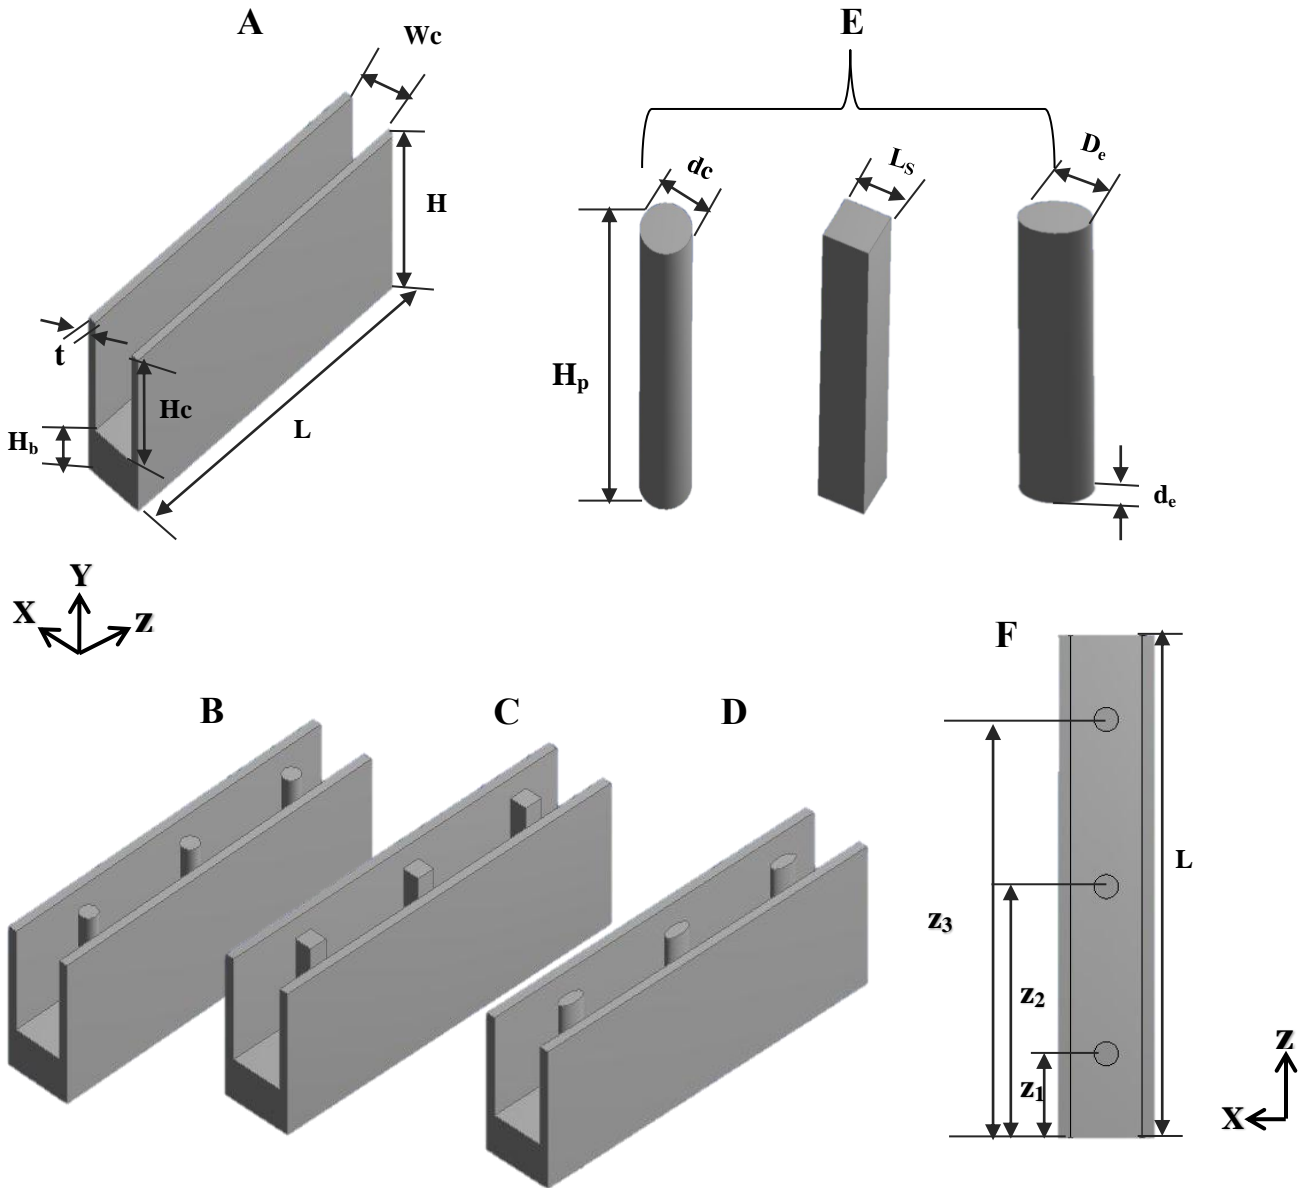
Plate-pins heat sinks: (A) Plate-Fins Heat Sink, FPHS (B) Plate-Circular Pins Heat Sink, PCP (C) Plate-Square Pins Heat Sink, PSP (D) Plate-Elliptic Pins Heat Sink, PEP (E) pins dimensions and (F) pins location.
